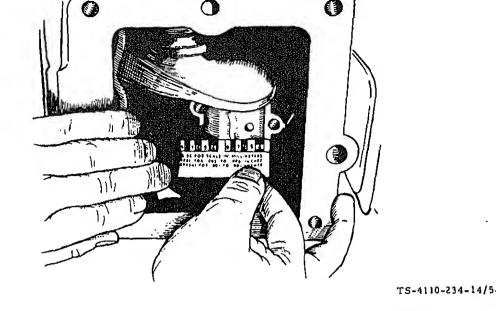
Measuring Bearing Clearance with Plasti-Gage F10000RG-2
